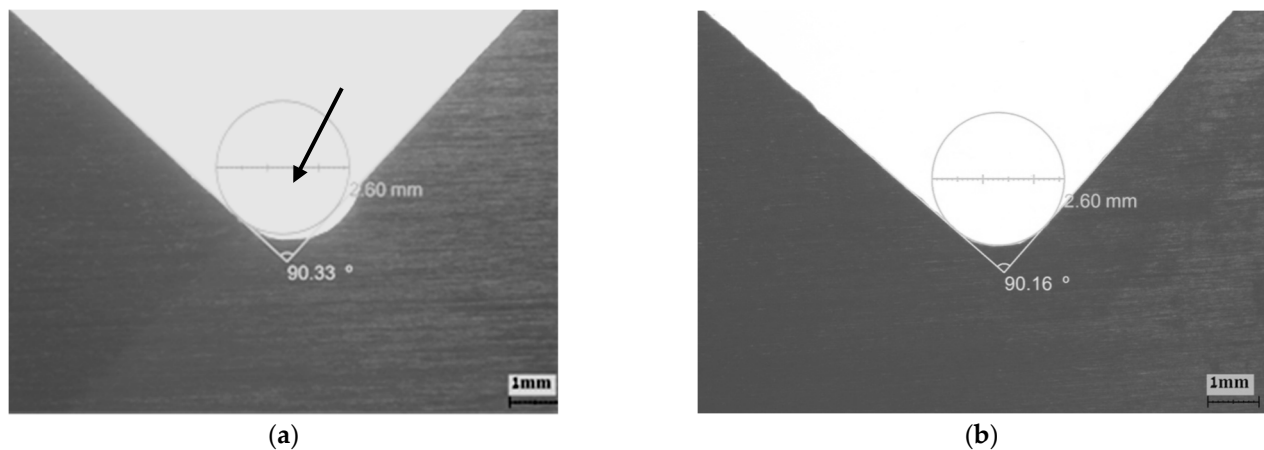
Radius profile and the angle notch for the shear coupon machined in (a) mechanical (arrow mark the defect) and (b) water cutting.
